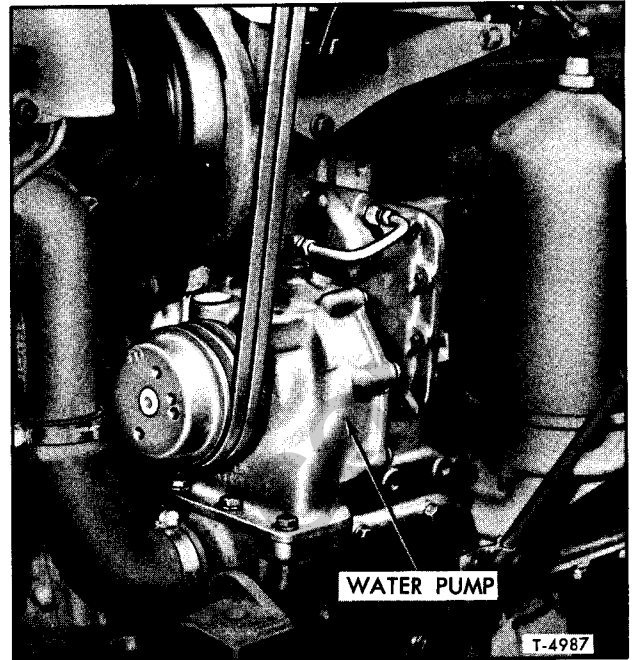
Water Pump Mounting (6V-53 Engine) (Typical)
